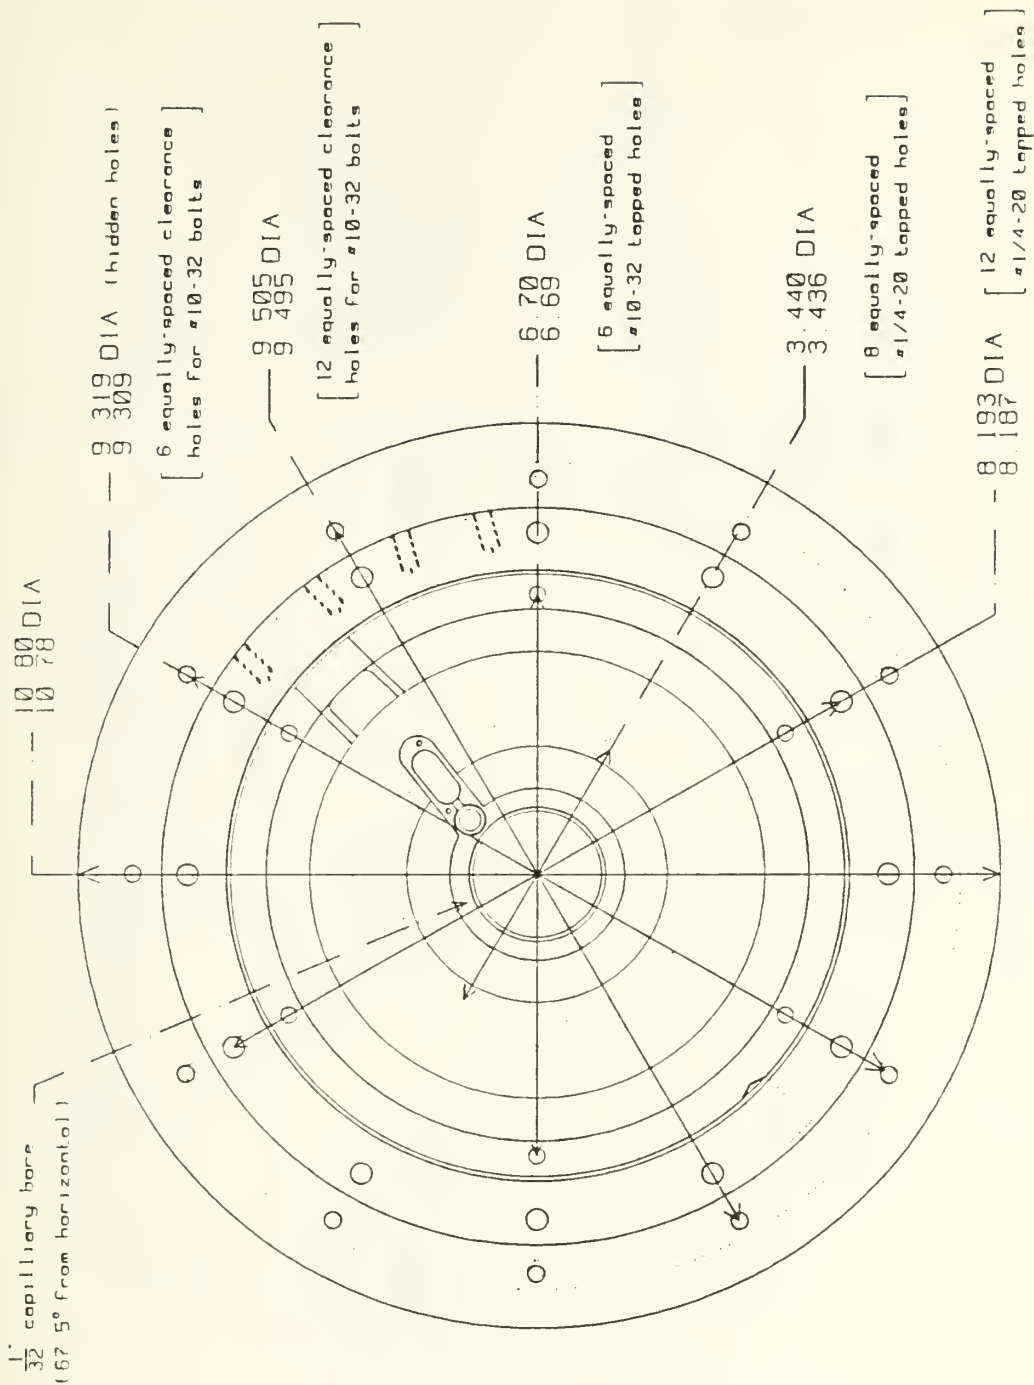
Top View of the Driver Housing Showing the Bolt Circle Dimensions
